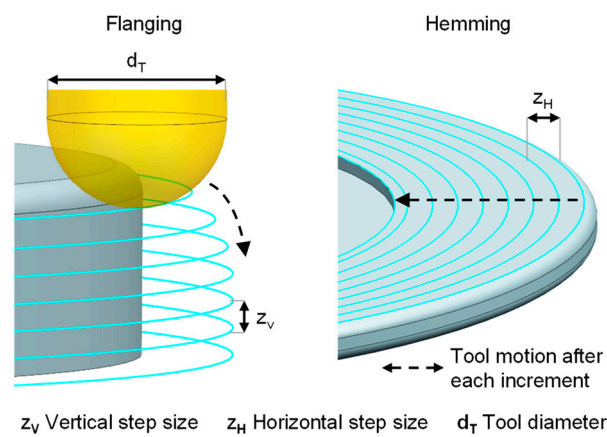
Exemplary tool paths for ISF flanging and hemming [20].
